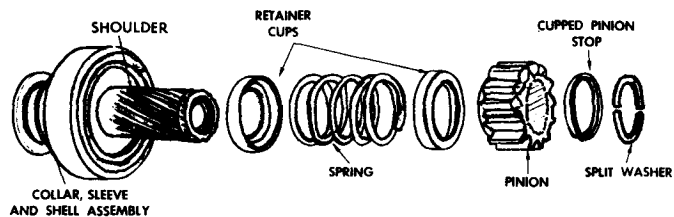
Disassembled view of early type heavy duty sprag clutch drive assembly.
